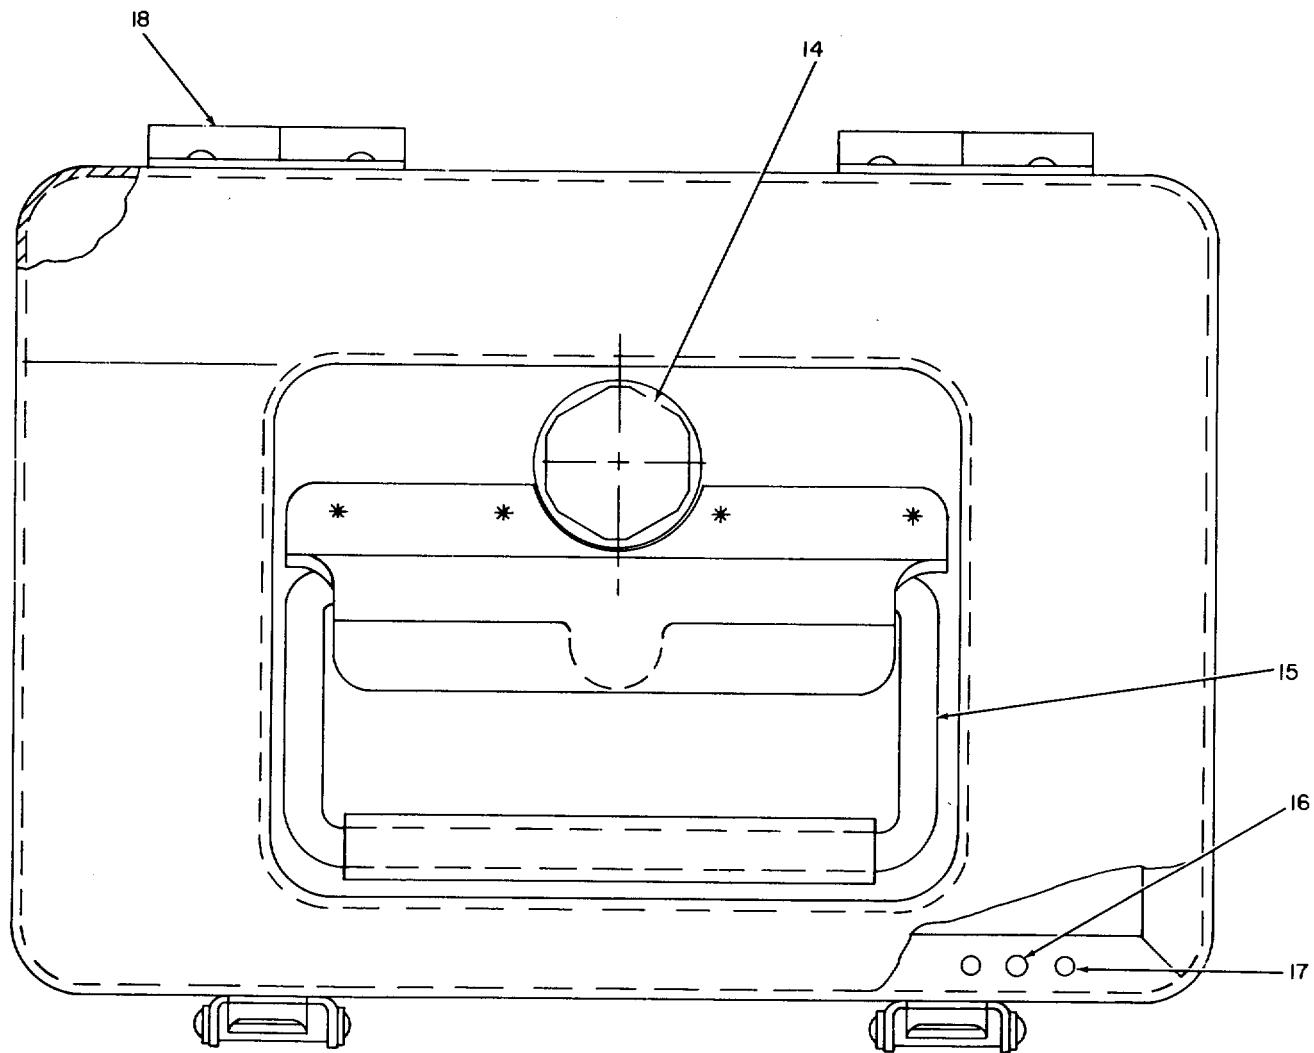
Socket Assembly, Charging (Sheet 2 of 2).
